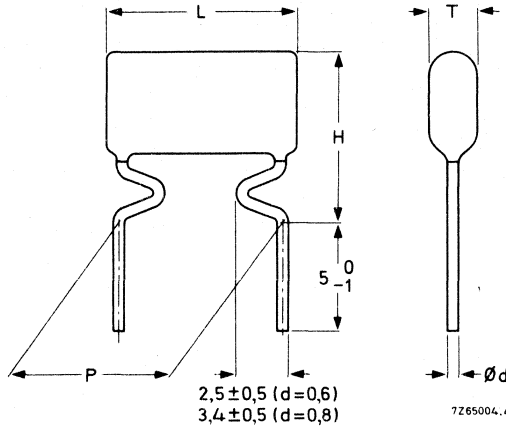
For dimensions T, L, H, P and d, see tables below.
